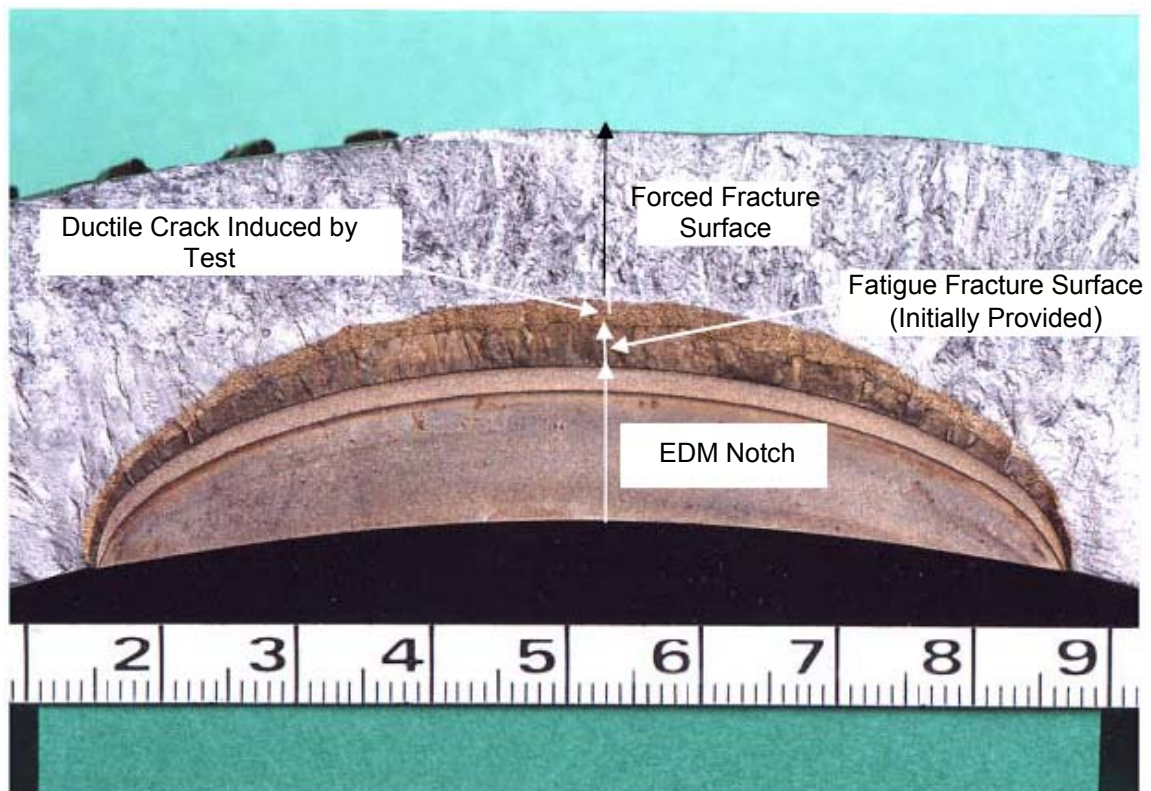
Fracture Surface Image for Test Specimen L1
